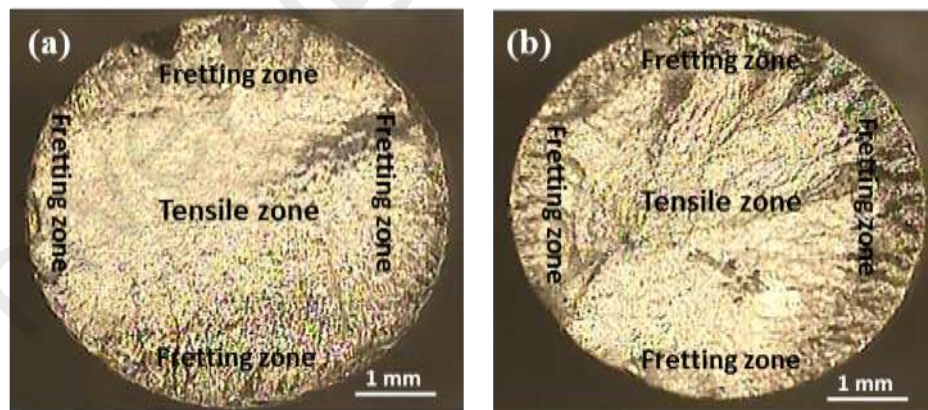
Typical microscopic view of the fractured samples' cross sections: (a) ECAE+HT and (b) ECAE+HT+HA under fretting fatigue
